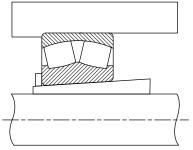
Spherical roller bearing mounted with an adapter sleeve.
